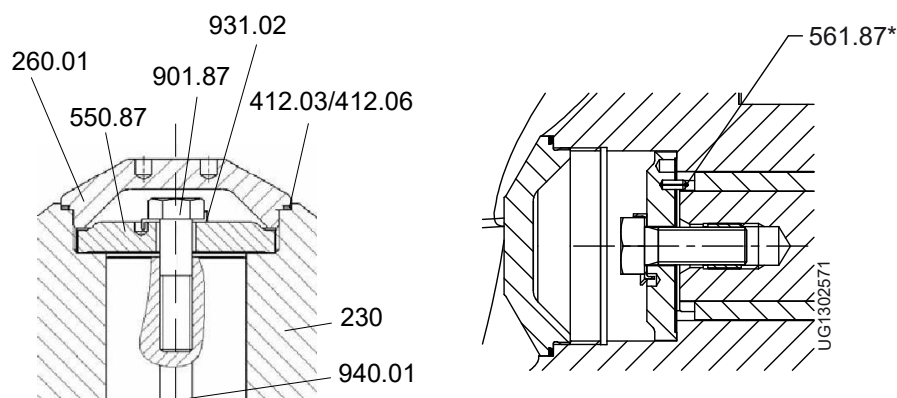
Fitting K and E impellers with impeller screws M100, M125 or M160
